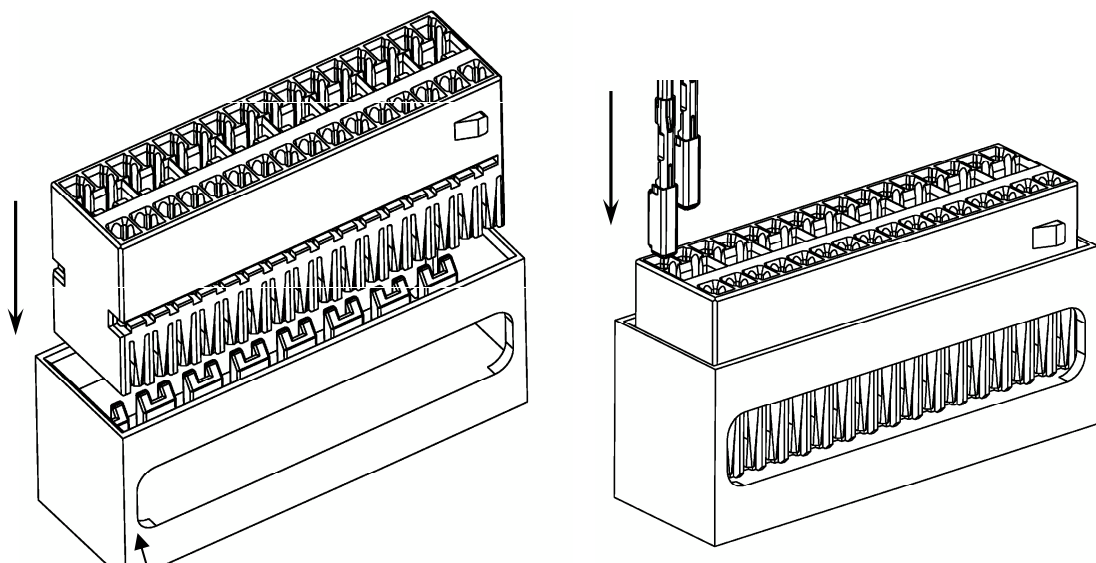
, 4: SOCKET HOUSING, DEFLECTION DEVICE (32-WAY PICTURE)
